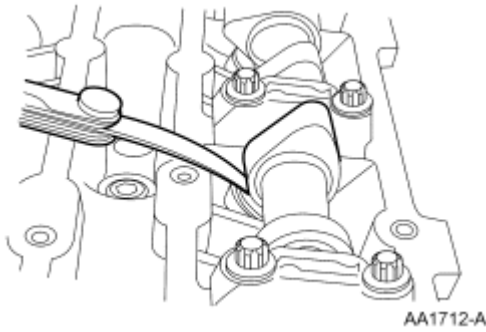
Measuring Each Valve's Clearance Using A Feeler Gauge
